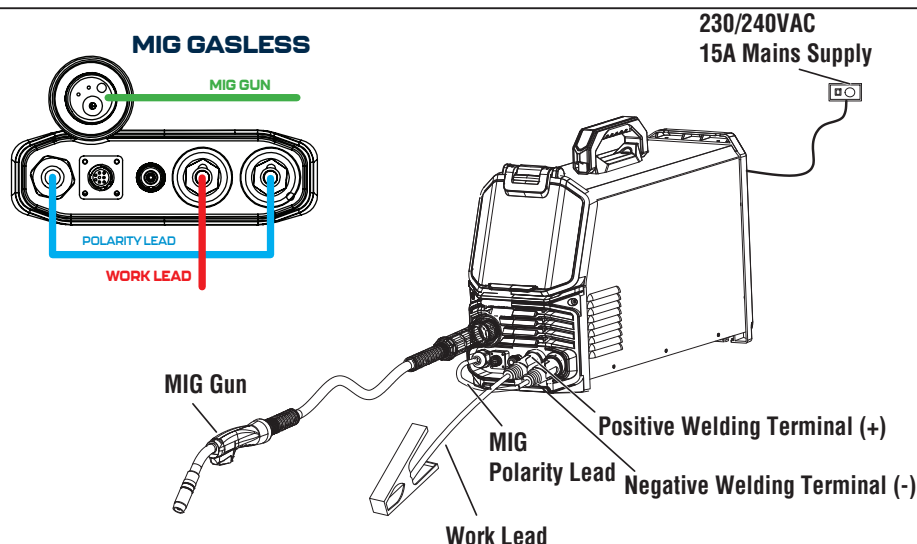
Setup for MIG Welding with Gasless MIG Wire
